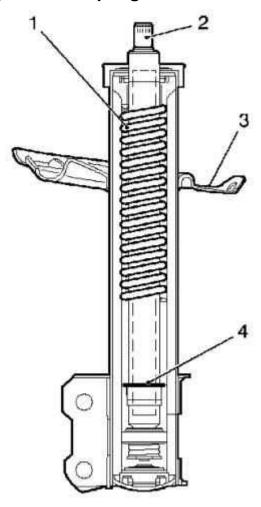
Spring rack with springs of the all-clear: 1 - spring of the all-clear, 2 - piston, 3 - spring plate on the shock absorber, 4 - limiter on the piston rod
